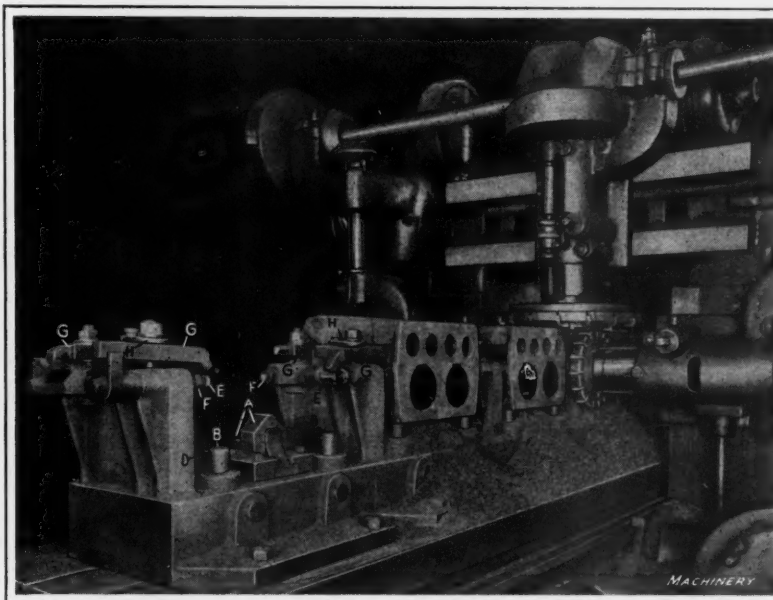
Ingersoll Multiple-spindle Milling Machine with Interlocking Cutters which produce Sharp Edges required on Hinkley Cylinder Blocks
